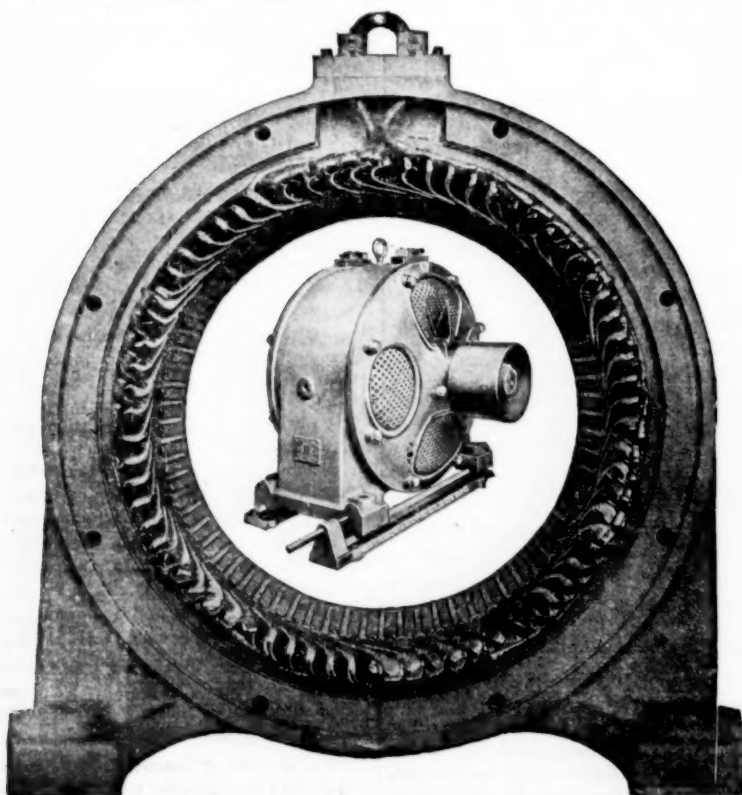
STATIONARY PRIMARY OF WESTINGHOUSE TYPE "C" INDUCTION MOTOR, 400 H. P., WITH COMPLETED SMALLER MOTOR WITHIN.
